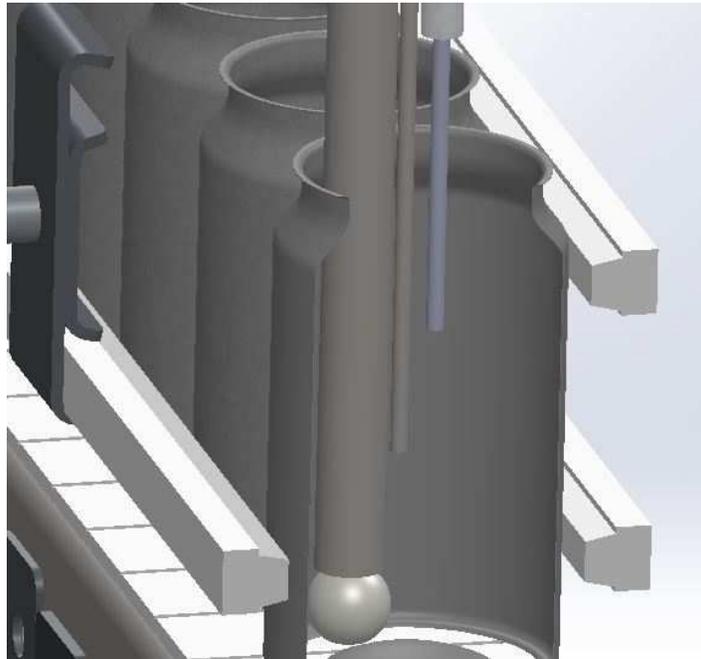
Filler Nozzle and Probe Assembly Cross-Section
